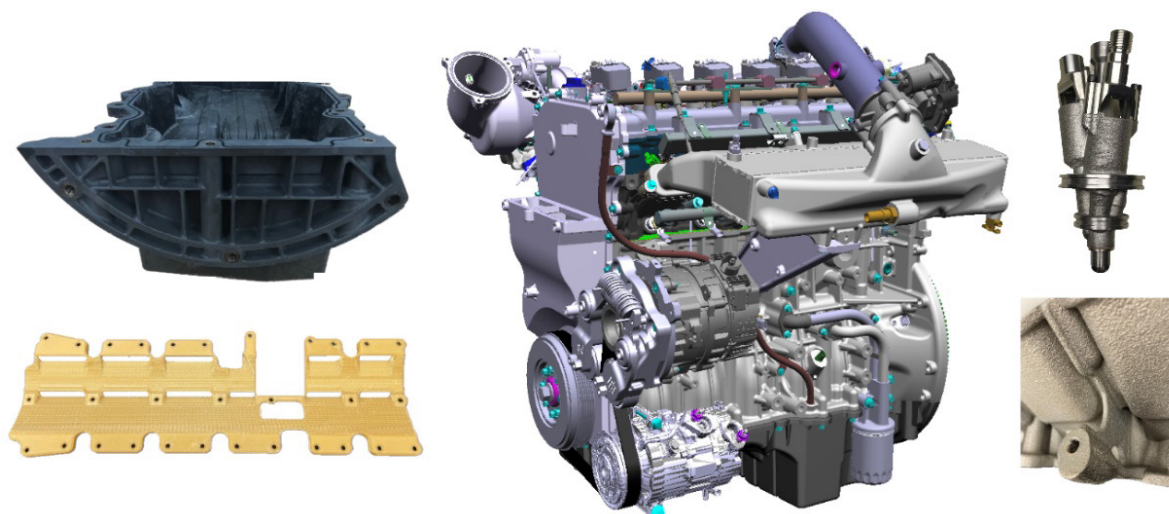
Oil pan, windage tray, engine assembly, pre-chamber ignition system, and reentrant casting features.
